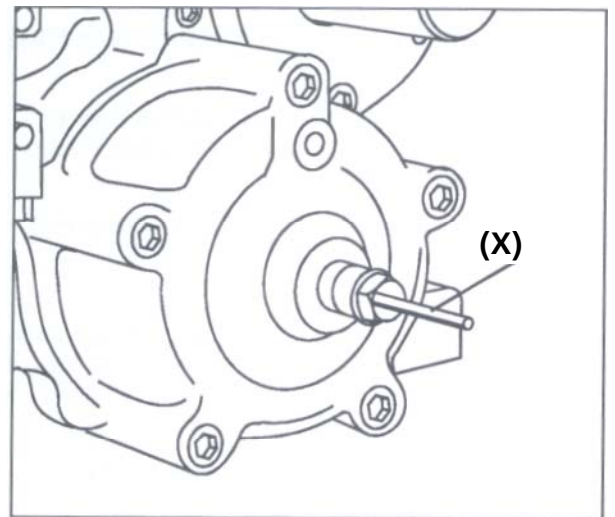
View of the pressure pipe (X) after removal of the position sensor (123)
